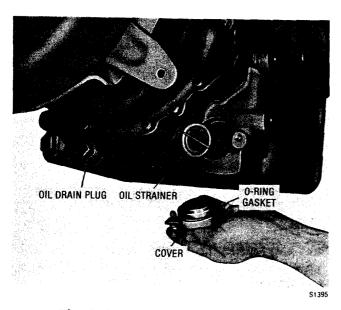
Removing oil strainer and gasket (-3 models)
